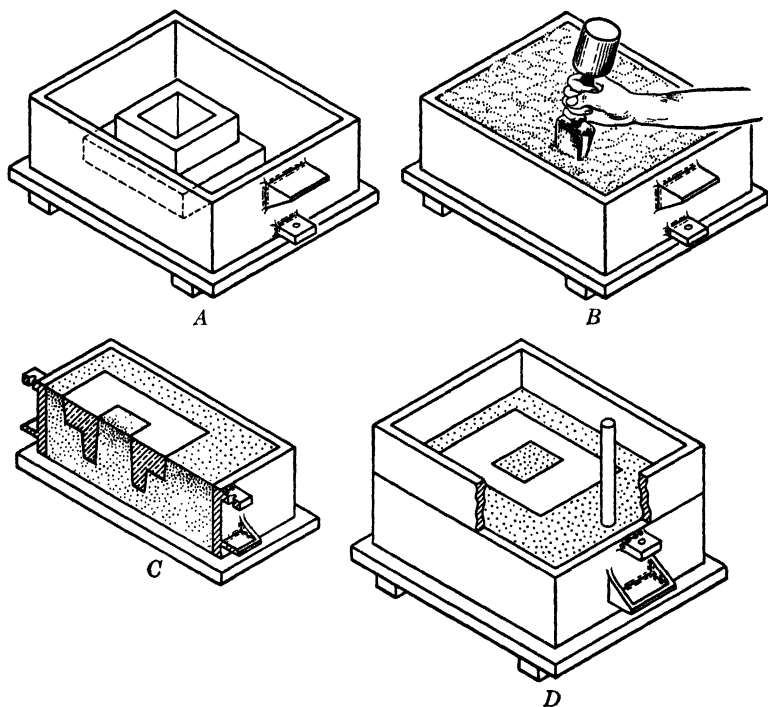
A. Pattern and flask in position to be molded. B. Drag being peen rammed. C. Sectional view of drag after it is rolled over. D. Sprue is placed in position, and cope is about to be rammed up.
